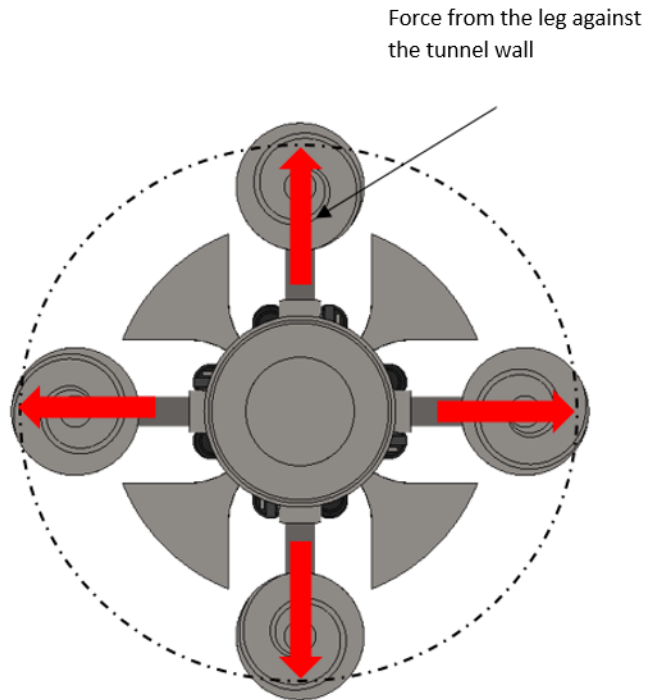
Screw's direction of the force when pressed against the tunnel's wall
